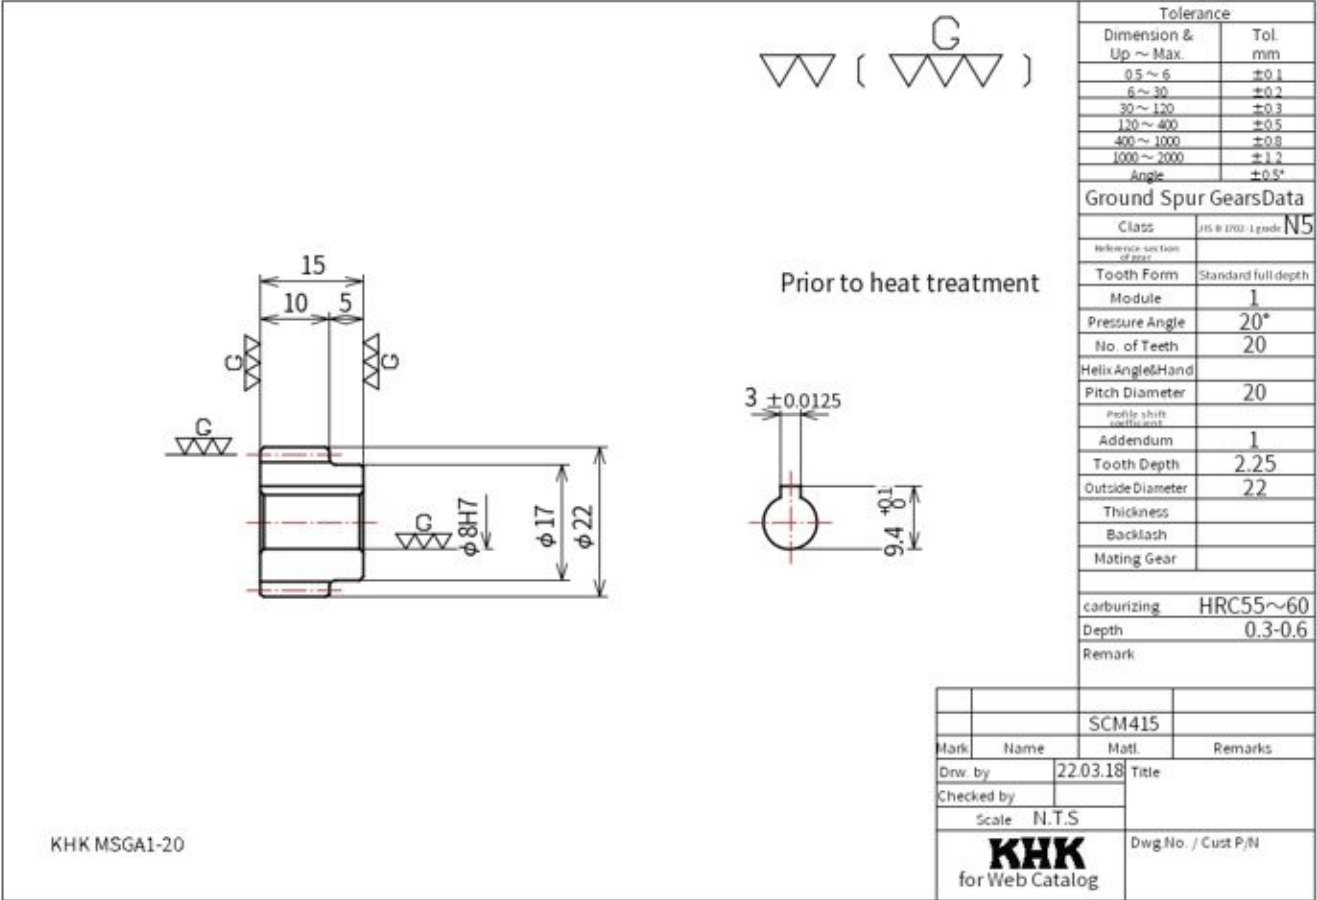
The engineering drawing for the gear connect to gear 4 and gear 3.
